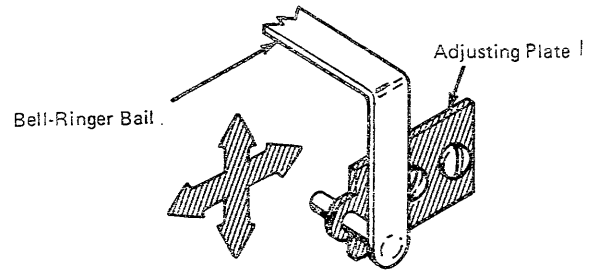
Bell-Ringer-Bail Adjusting Plate (Level 2)
